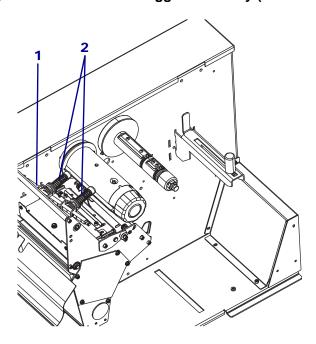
• Remove the Head Open Handle (Xi4 shown)
